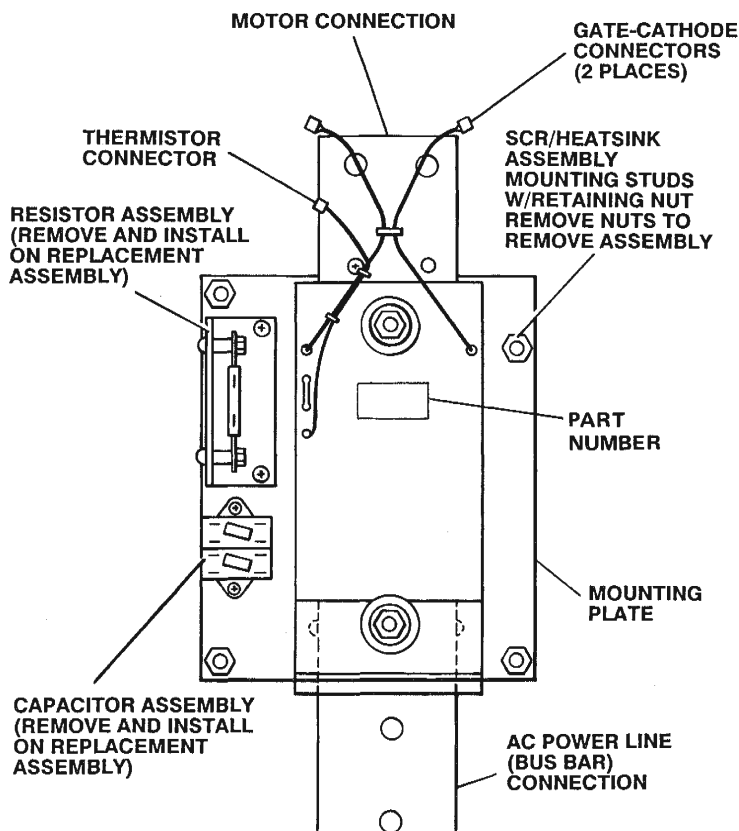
ILLUSTRATION OF SCR/HEATSINK ASSEMBLY
